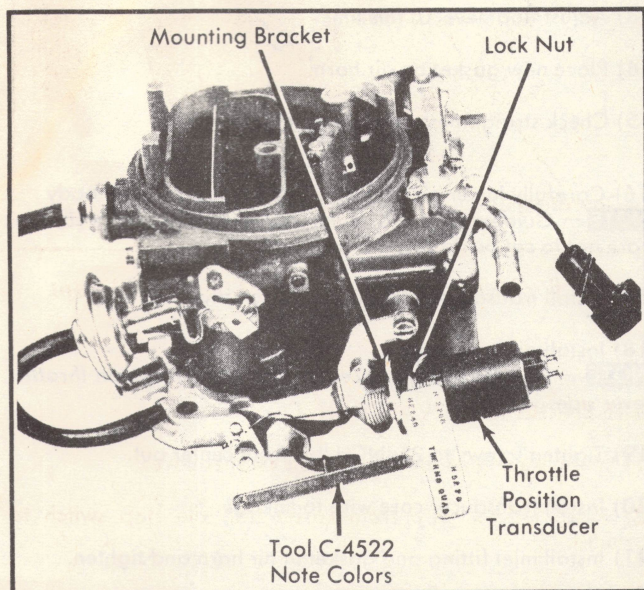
Using Measuring Tool C-4522 To Measure Transducer Clearance
